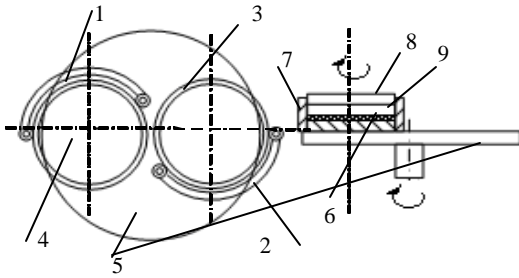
Elastic unit lapping experiment system 1- Correcting ring separator 2-Correcting ring 3-Friction wheel 4-Loading holes 5-Elastic-unit plate 6-Workpiece 7-Binder 8-Weight load 9-Substrate
